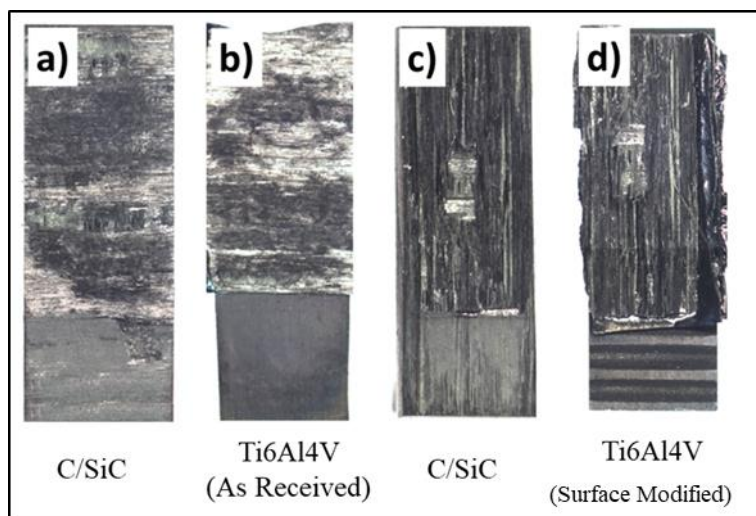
Macrographs of Post SLO fracture surfaces of (a) and (b) C/SiC-TiB590-Ti6Al4V and (c) and (d) C/SiC-TiB590-Surface modified Ti6Al4V bonded specimens.
